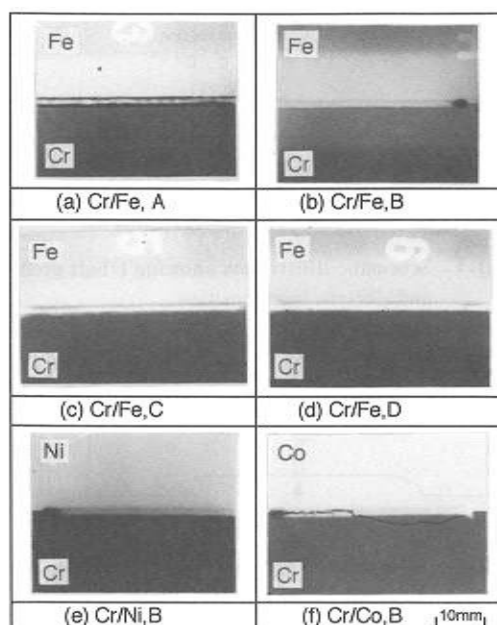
X-ray photographs of dissimilar welded joints.
